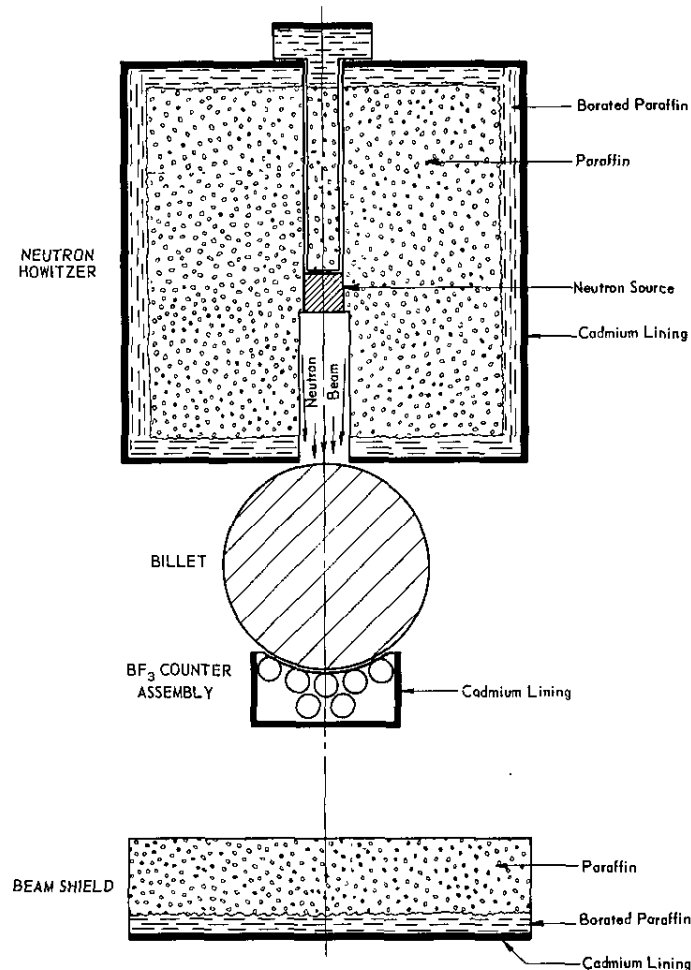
CROSS-SECTIONAL VIEW OF THE BILLET TESTER
